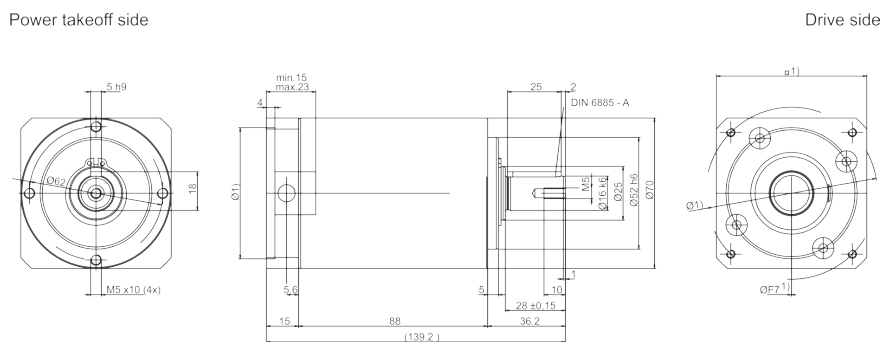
Gear box type AG2210-LP070S-MF1-7-1D1.
